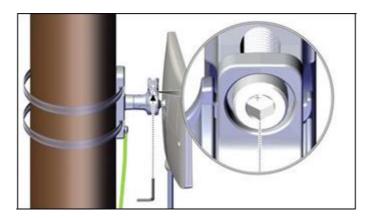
Use hex screw to further tighten arm on mount: SU PRO/AIR EMB radio unit
